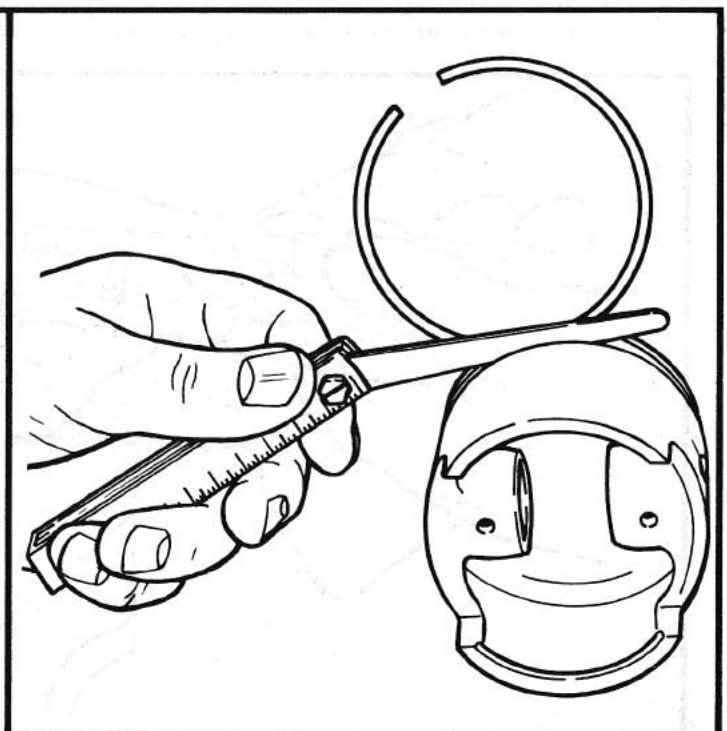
MEASURING RING SIDE CLEARANCE
